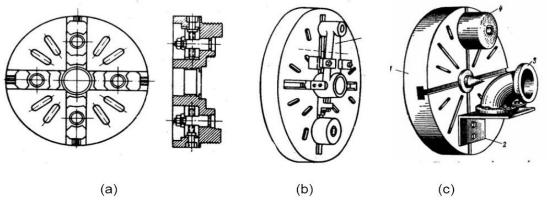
Mounting of odd shaped jobs on face plate in centre lathe
